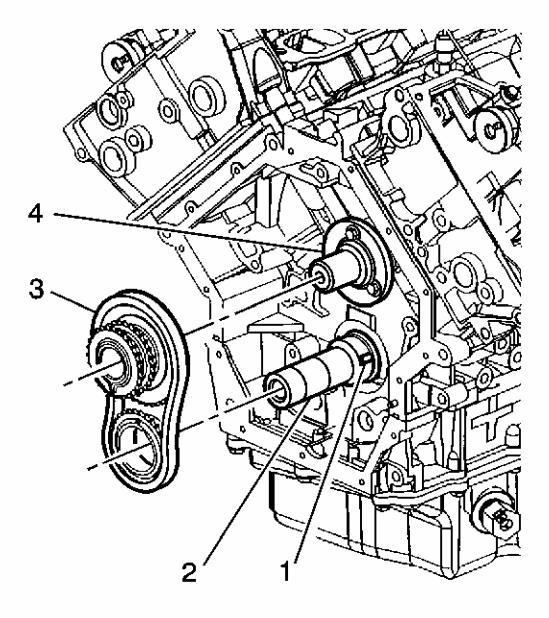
Identifying Drive Chain & Sprockets Courtesy of GENERAL MOTORS CORP.
